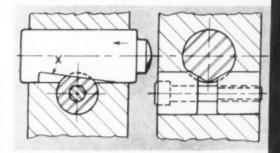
This sketch shows a work support jack as applied to a holding fixture.
